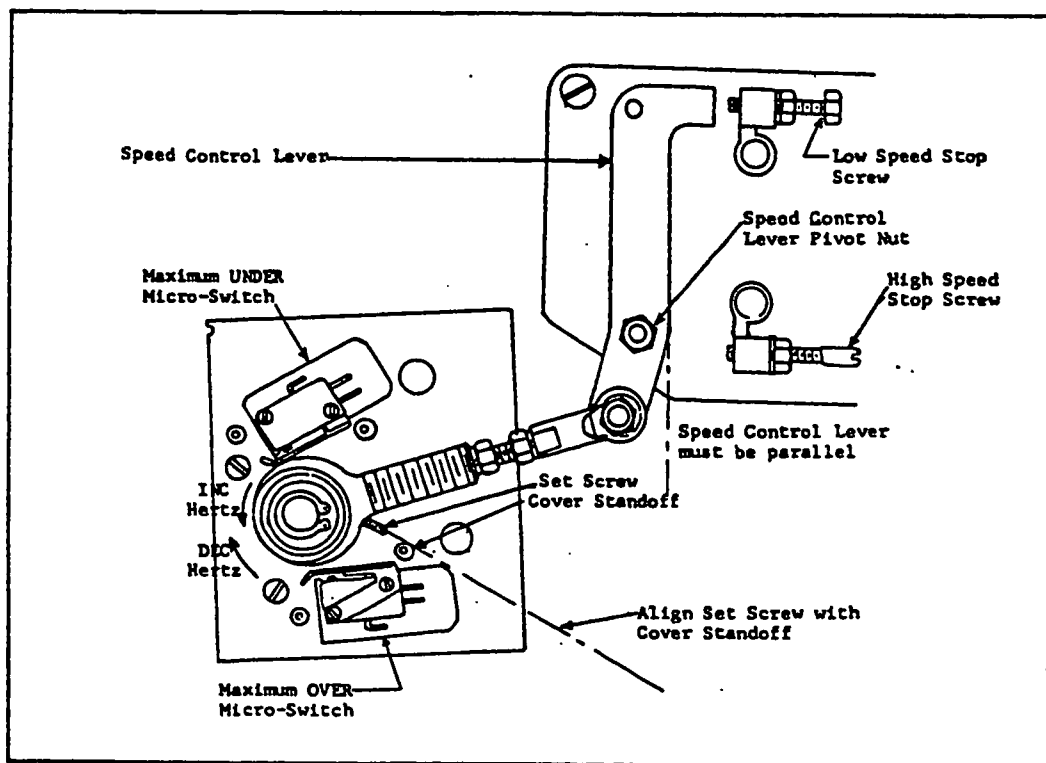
E. Initial Setup of Throttle Positioner Assembly
